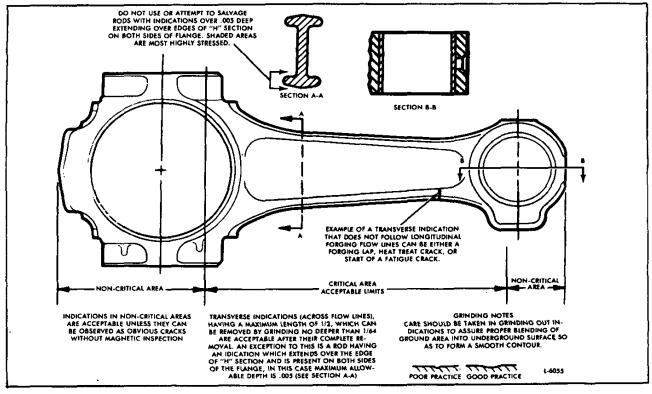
Magnetic Particle Inspection Limits for Connecting Rod
